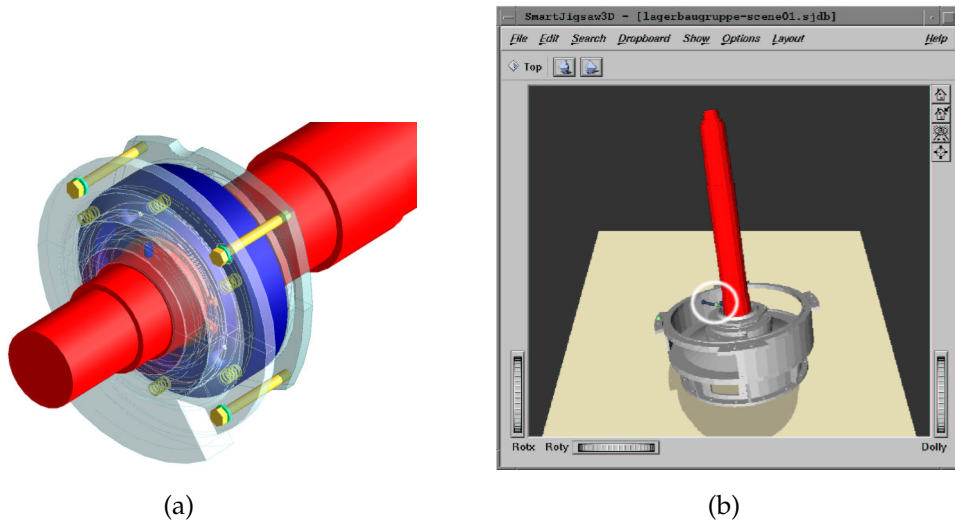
Constructing a bearing device out of its components. The completely assembled device is shown in 6.18(a) whereas 6.18(b) shows a construction snapshot in an early stage of assembly.
